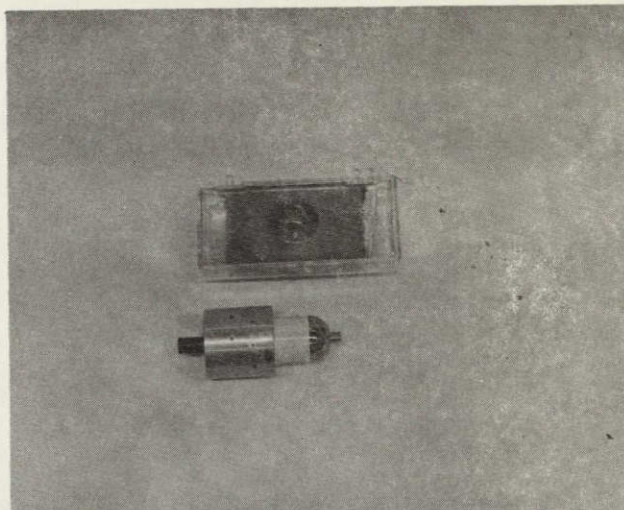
Male Spherical Bearing on its Holding Fixture and a Conforming Mask on the Metallic Coating with One Land Area Removed
